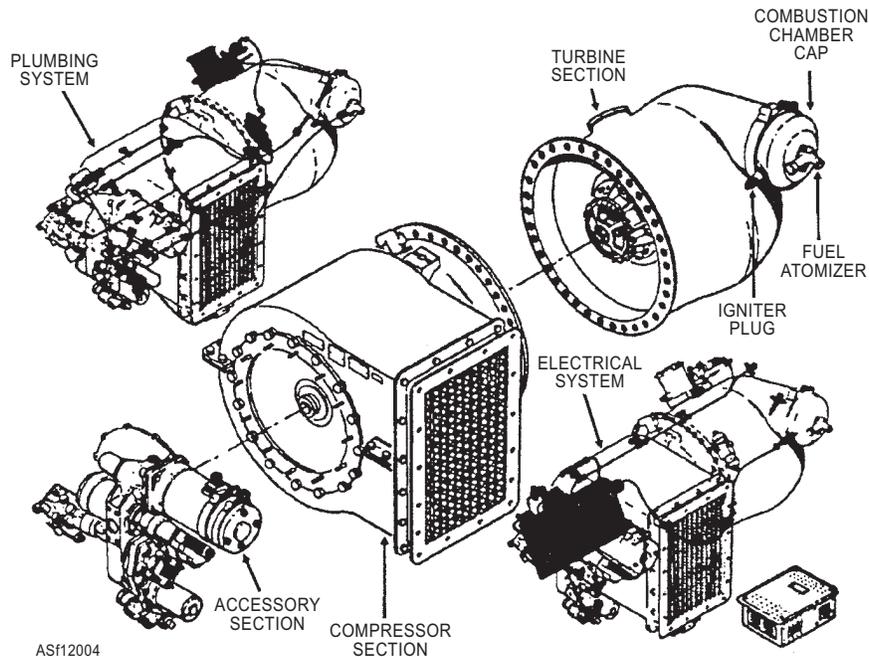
Major sections of a gas turbine compressor (GTC-85).
